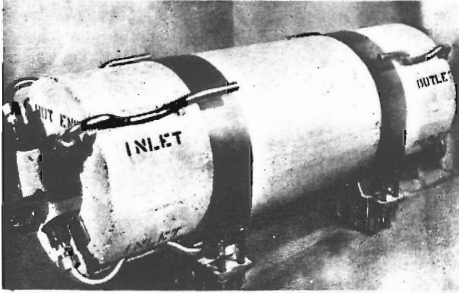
Typical machine-frequency coil. (*The Ohio Crankshaft Co.*)
